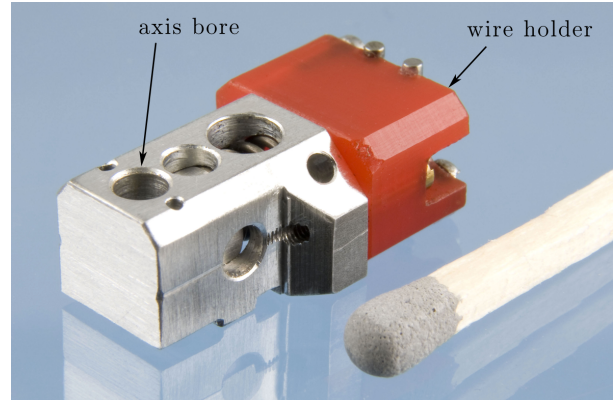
Prototype of a SMA Actuated Coupling Device
